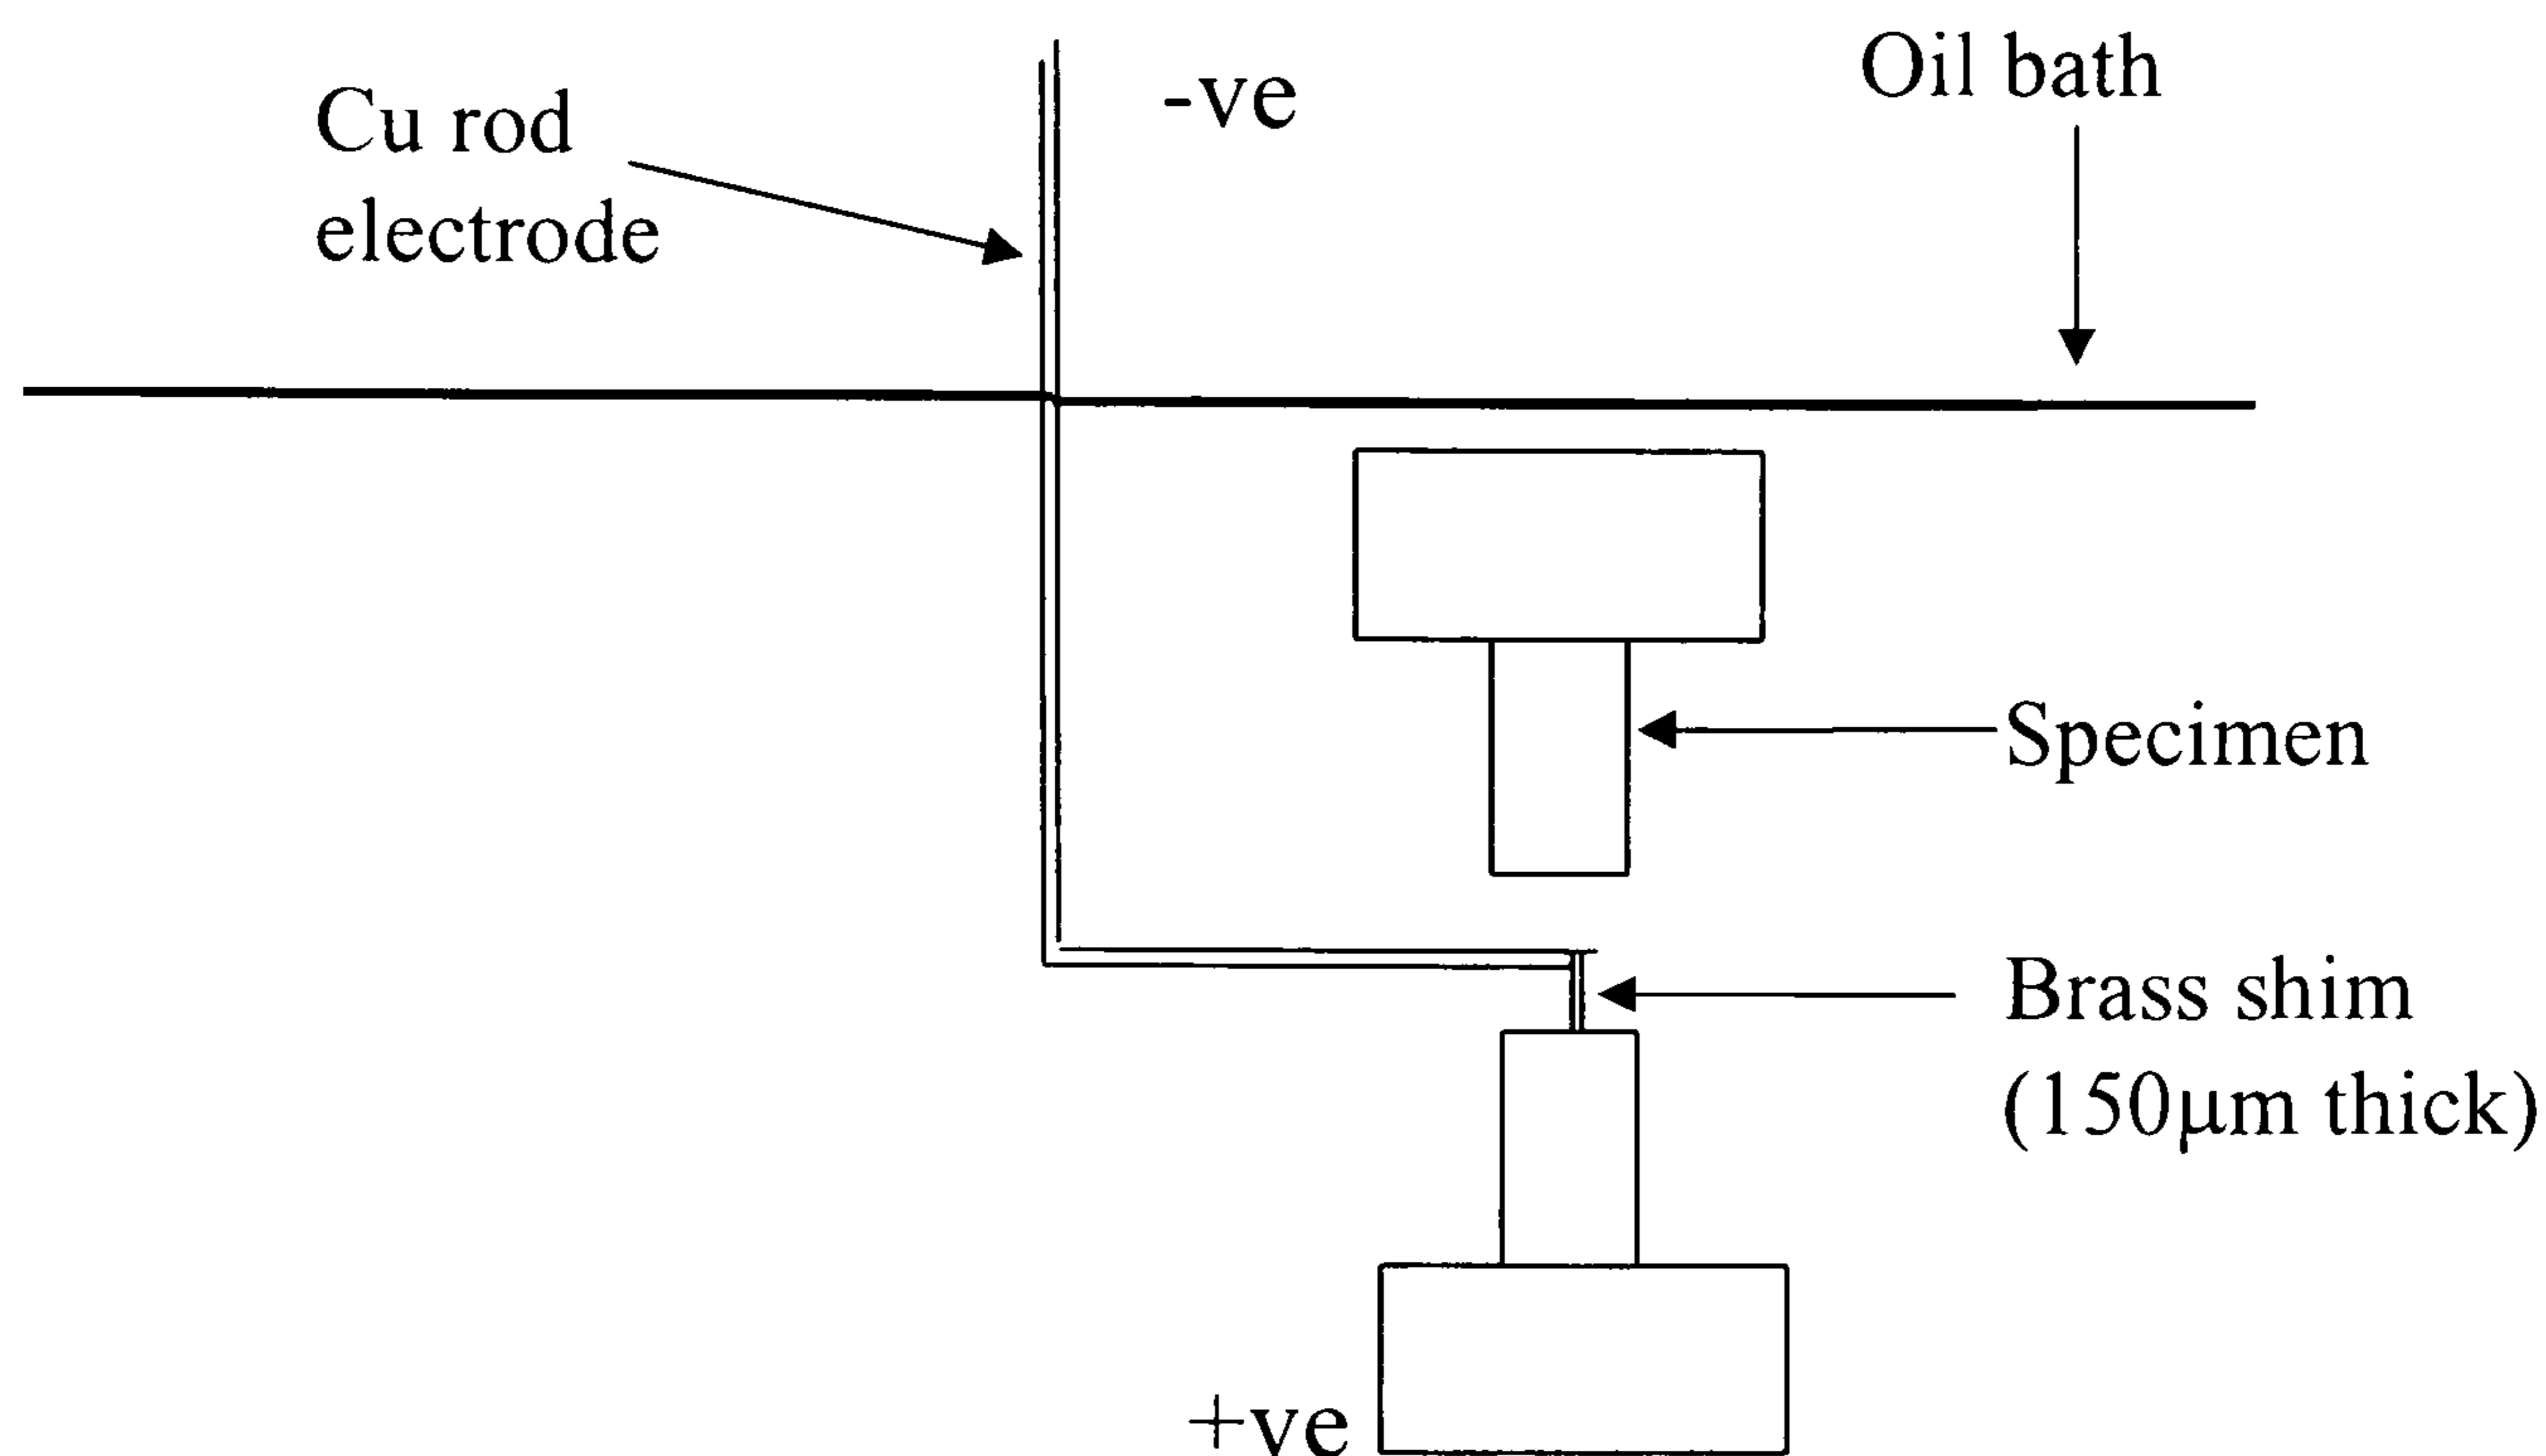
Diagram showing arrangement to produce spark machined defects inside 5mm diameter hole in the calibration specimen.
